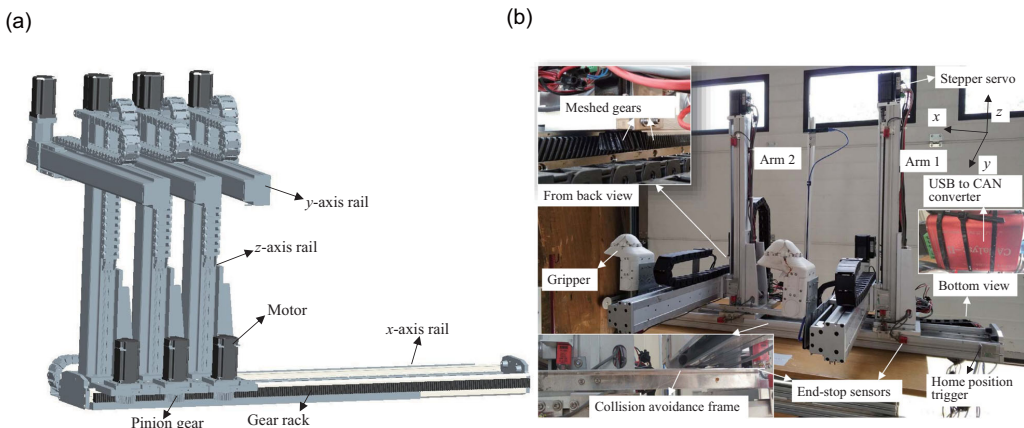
Single-rail Cartesian-type multiarm: (a) 3D model shows that the three Cartesian arms move on a single rail (x-axis) using pinion-rack gear transmission; the single-rail (x-axis) could be mounted with two or more arms; (b) the prototype of a dual-arm system; the single-rail multiarm only needs to be calibrated once to identify the transformation between the arm frame and the camera frame [Color figure can be viewed at wileyonlinelibrary.com]
